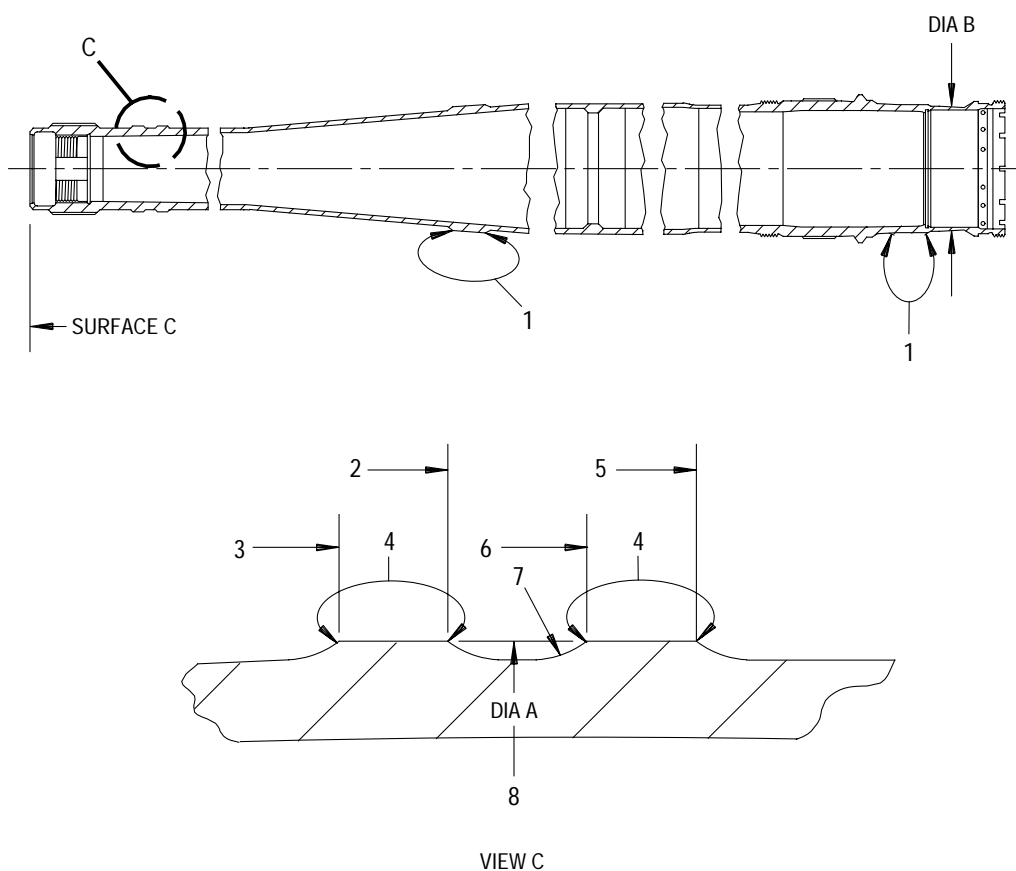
Front Compressor Drive Turbine Shaft - Spring Lock Retainer Snap Diameter Repair
